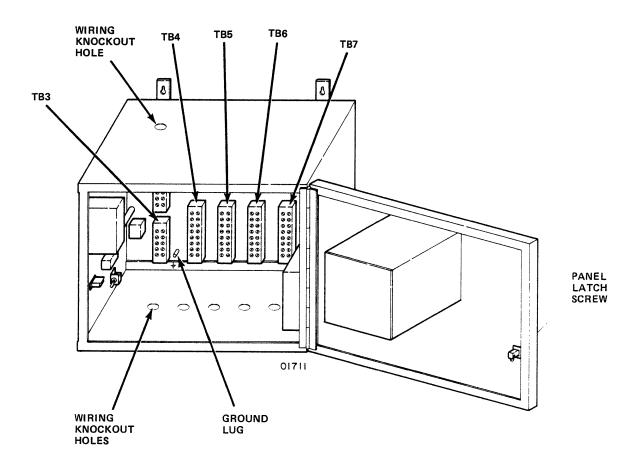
65348-1 Dew Point Sensor Wiring Locations
